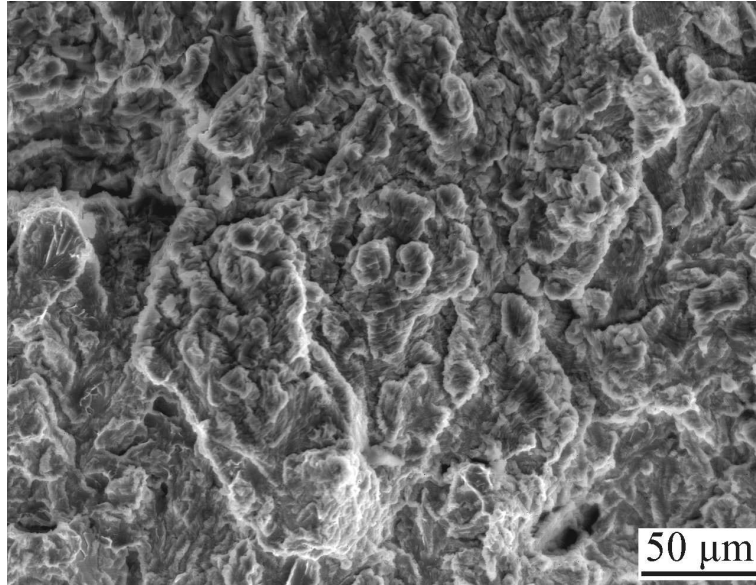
Fracture surface at weld junction of the X65HIC pipe after post-weld heat treatment, tested at -40°C .
